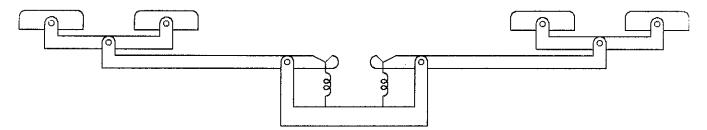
Side view of the long arm twin tandem collector assemblies.
